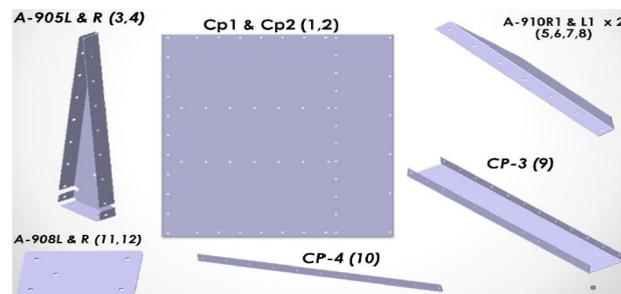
Parts of assembly kit of the RV-10 aircraft.
